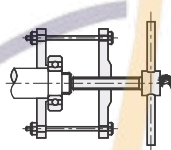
Removal of Inner Ring Using Withdrawal Tool (1)
